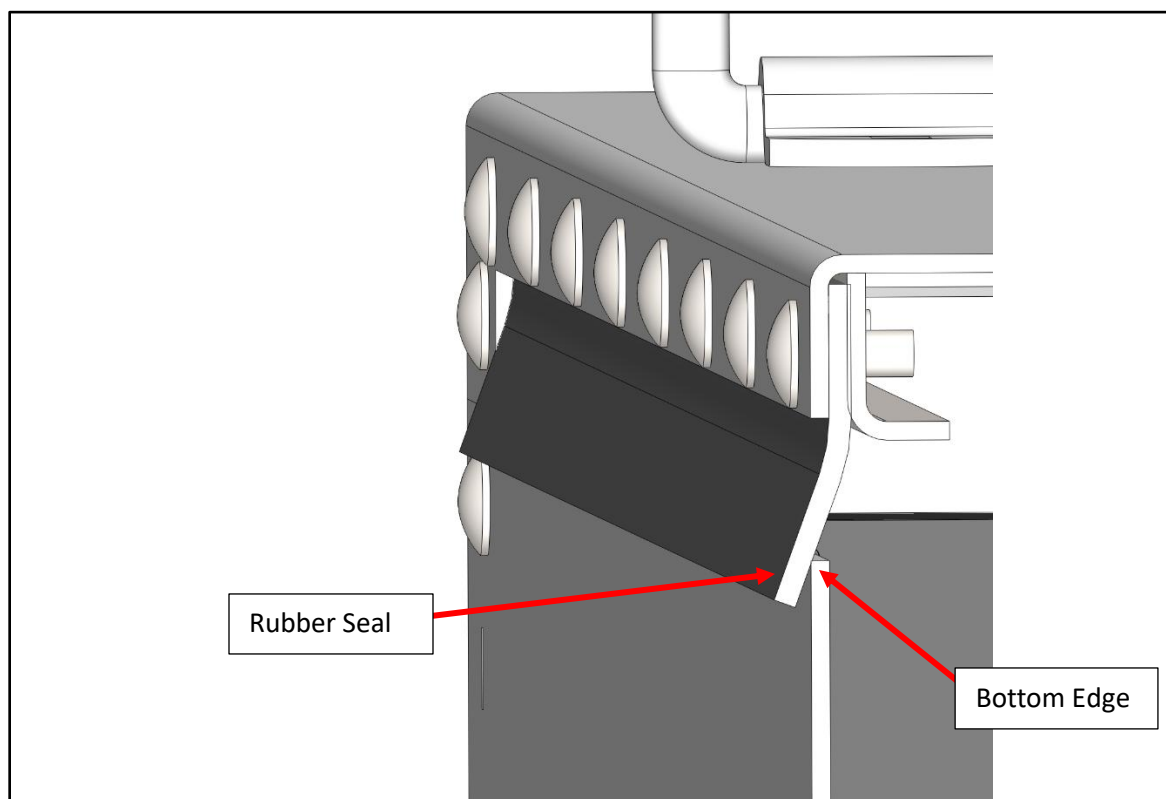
Rubber seal properly seated over the bottom edge of the aluminum enclosure.
